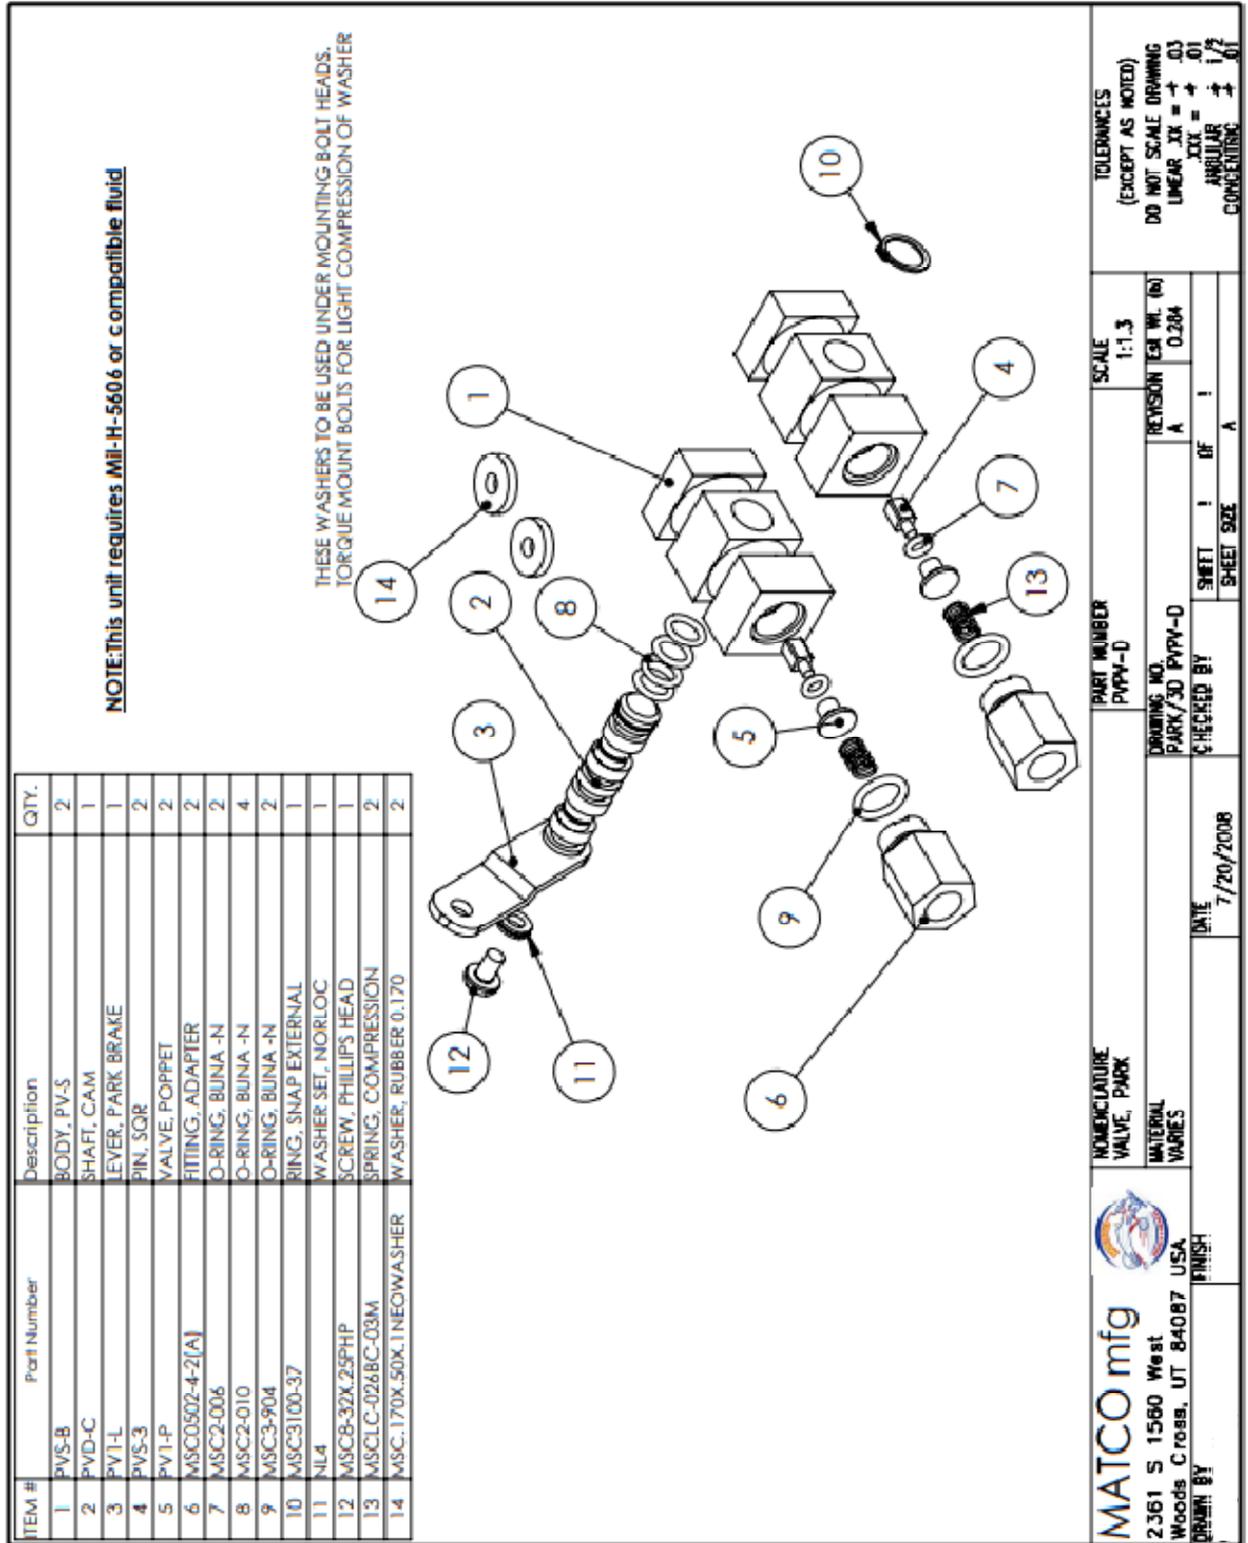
EXPLODED VIEW OF THE VALVE MATCO PVPV-D
